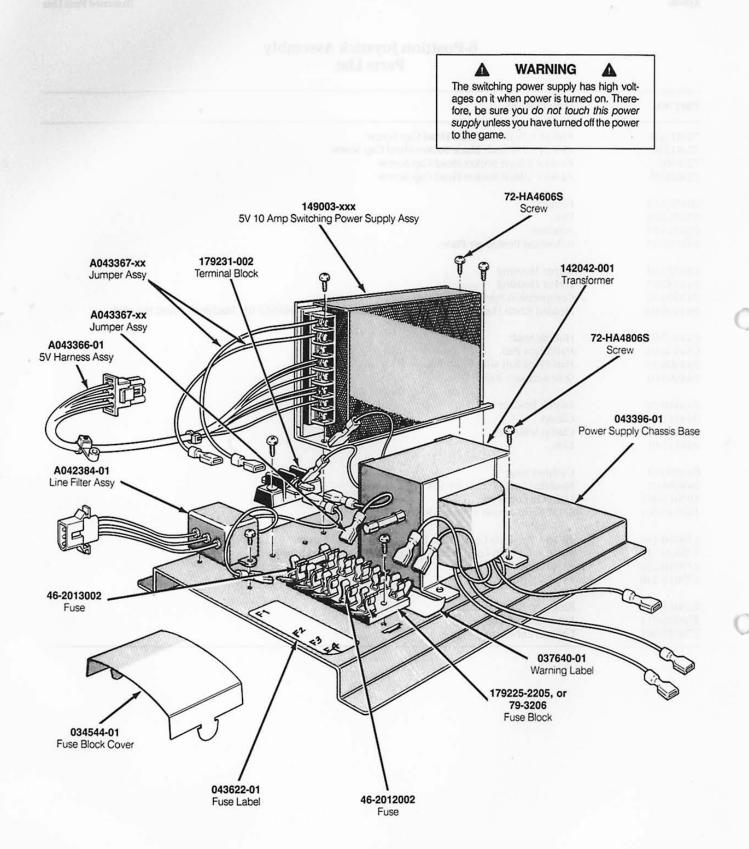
Switching/Linear (SL) Power Supply Assembly A044872-03 A
